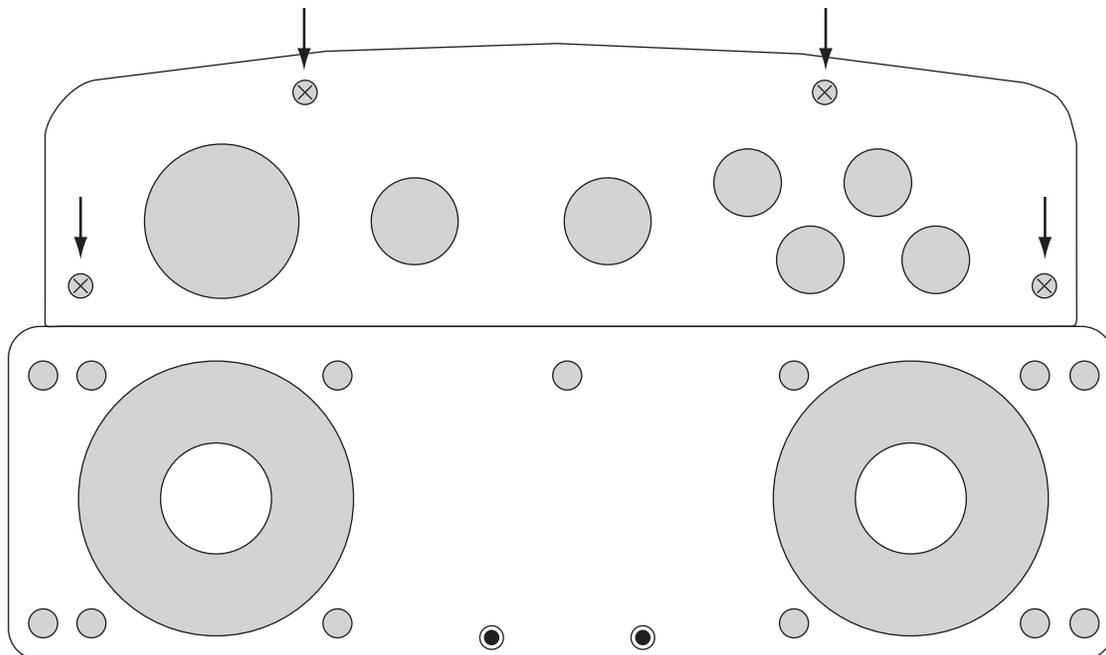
Bottom View with Location of Cover Mounting Screws
